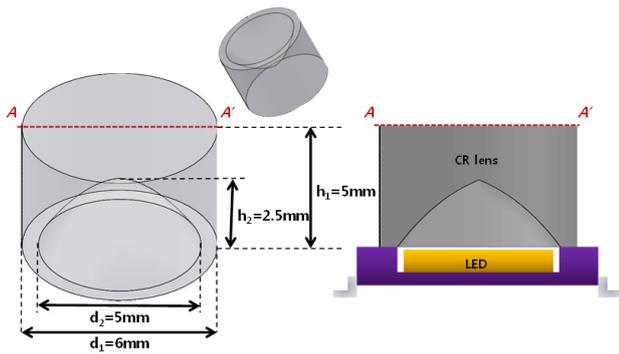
Dimension of surface-mount type CR-lens and cross sectional view
